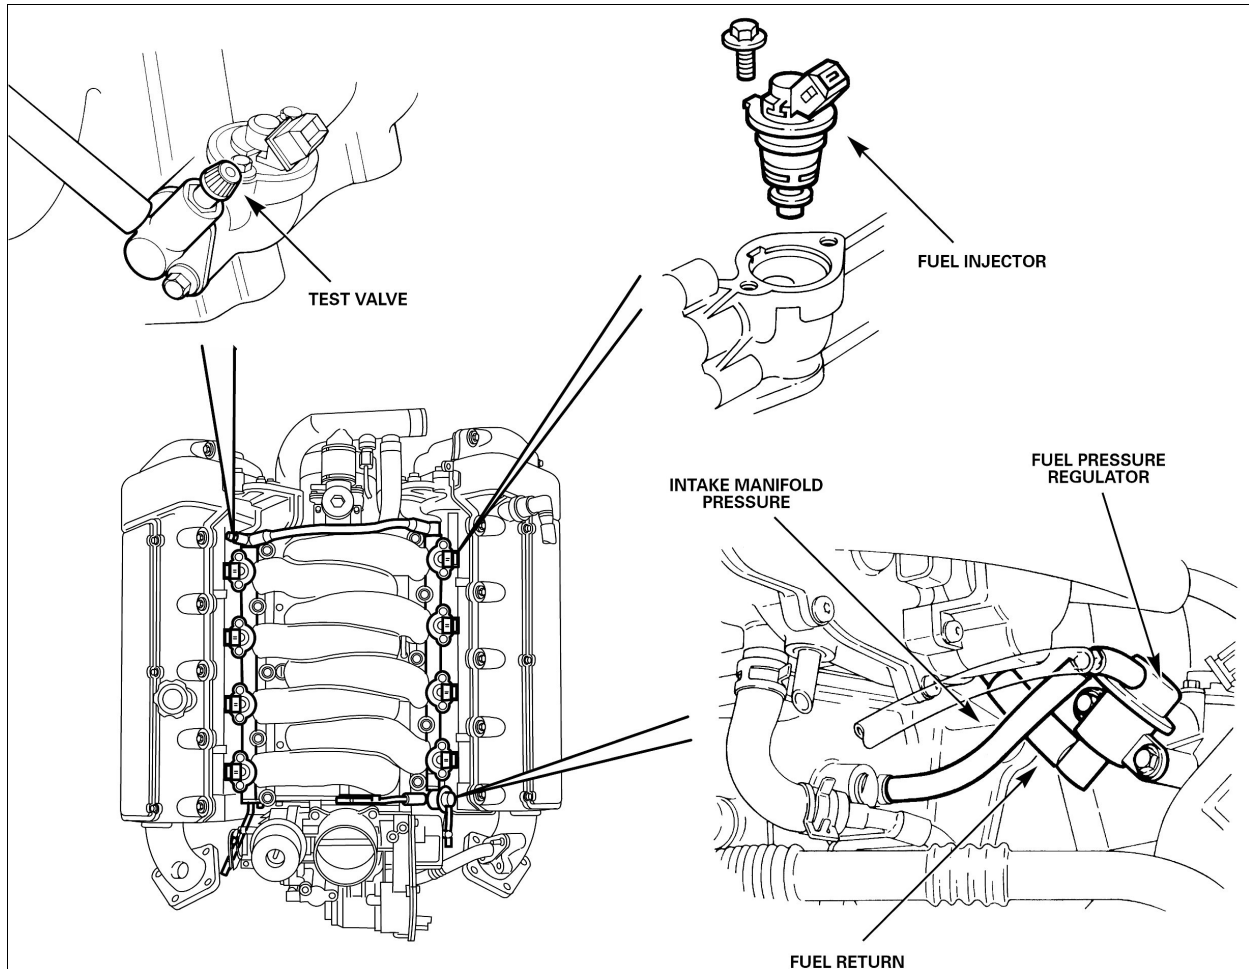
INTAKE MANIFOLD, FUEL RAILS AND FUEL PRESSURE REGULATOR – AJ26
